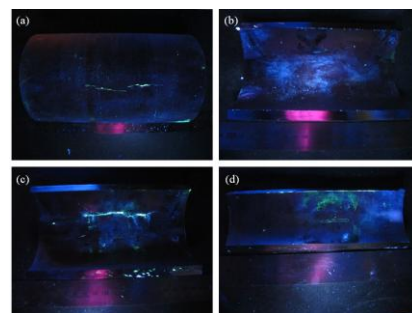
The fluorescent penetrant testing result (a) outer surface (b) inner surface of solution surface level (c) inner surface of solution surface level (d) welding bead
